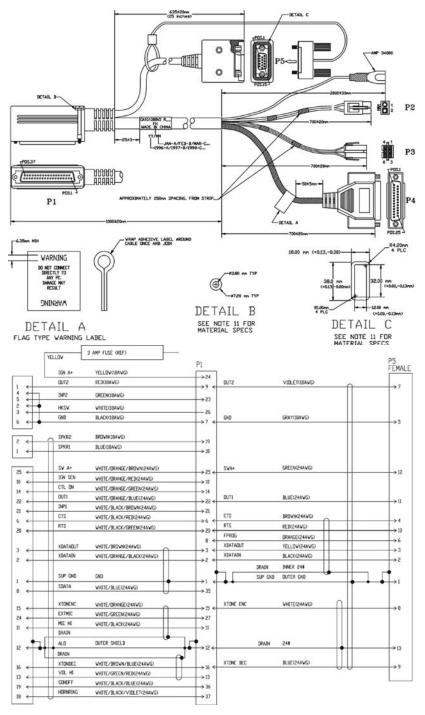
Front Mount Extended Option Accessory Cable CA101288V2
